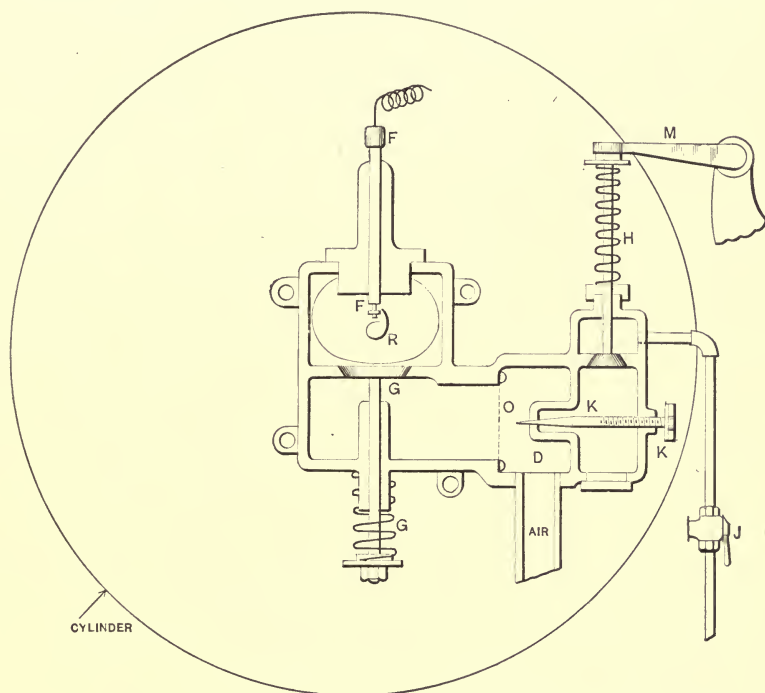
INLET VALVES OF GASOLINE ENGINE.
